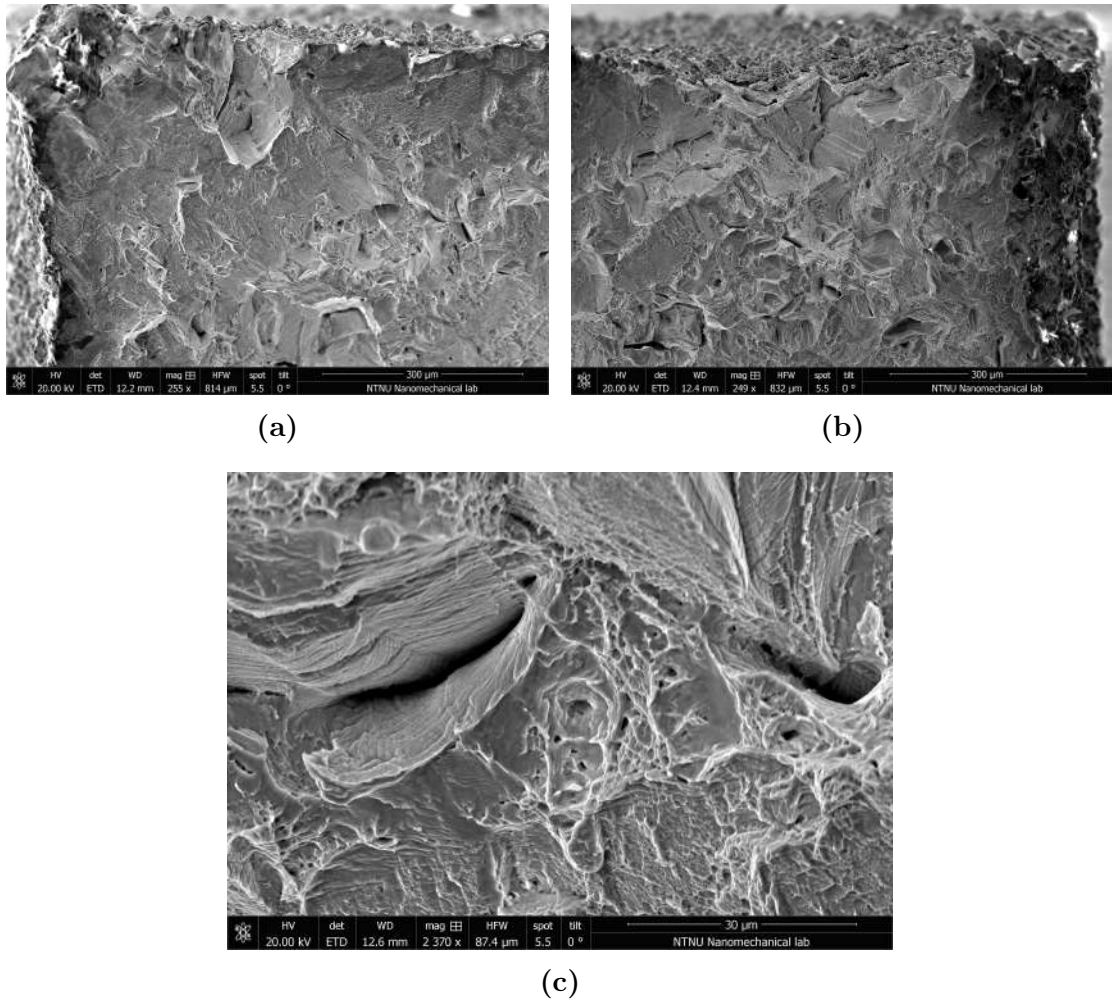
SEM fractography of the EDM-finished Ni 725 specimen tested in air. (a) Left-hand fracture quadrant near the specimen edge. (b) Right-hand fracture quadrant. (c) Central region of the fracture surface at higher magnification displaying dimples.
